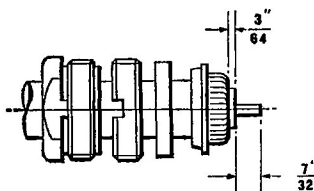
B—Assembly instructions—C Type plugs and sockets—Captive contact
